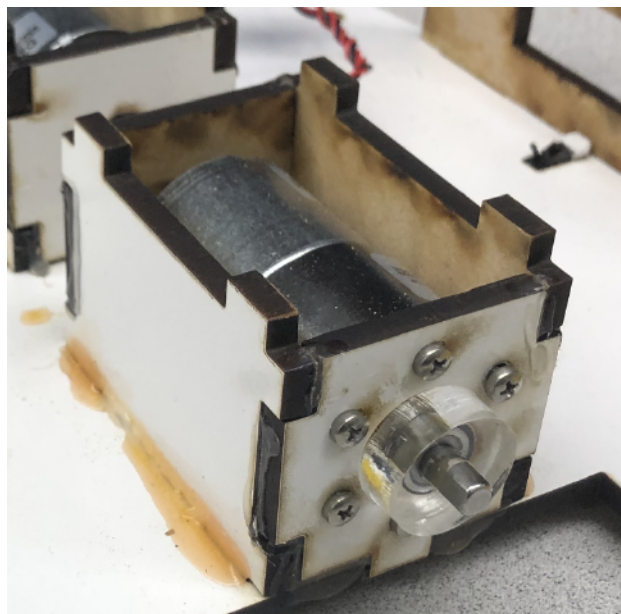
Constructed Motor Mount: The motor is held snugly and securely with the assembled motor mount and M3 screws.
